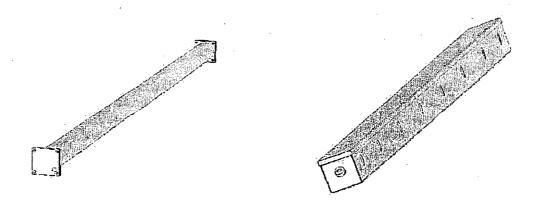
Rod Pipe (left) and Rod Box (right)
